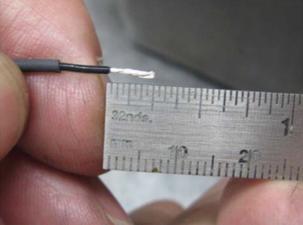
Stripping Wire Ends / Wire Ends Stripped (1/4")
